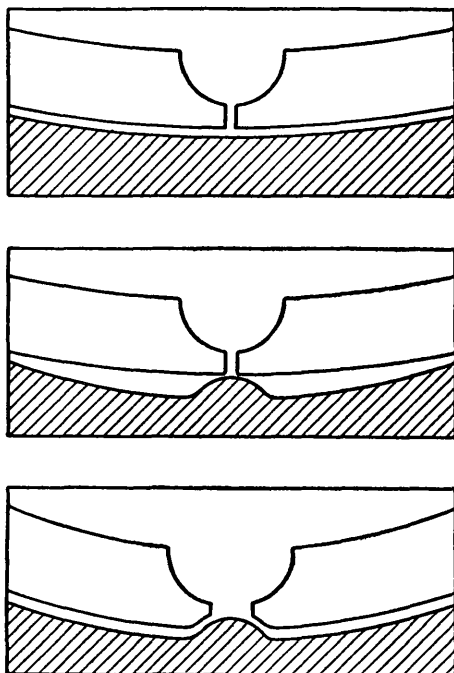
1935-51 pin-milled rings. When installing new rings always hone out vertical ridge formed at ring joint position in cylinder. B top view shows how ridge is formed. Center view shows how new rings are held off wall if ridge is not removed. Top view shows how new rings hug wall when ridge is honed out.
